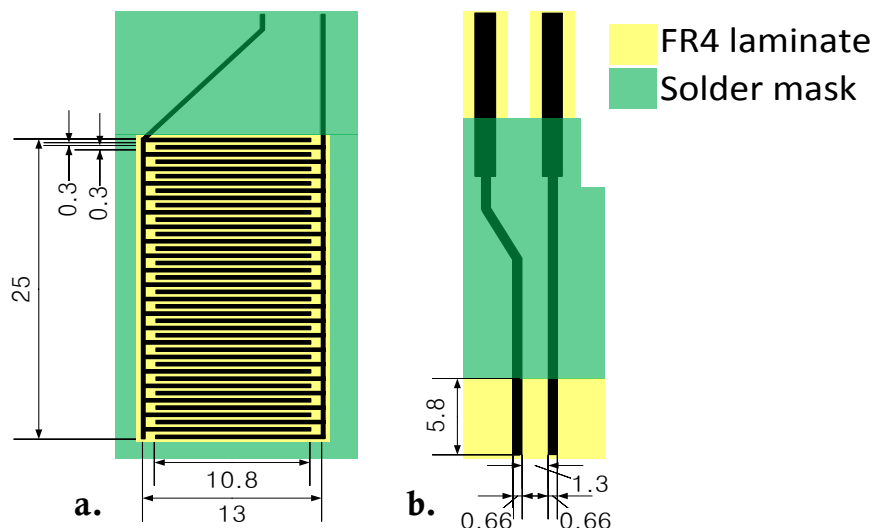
Test boards: a. SIR pattern and b. PCB with two electrodes used for impedance spectroscopy. The dimensions provided in the drawing are in millimetres (mm).
